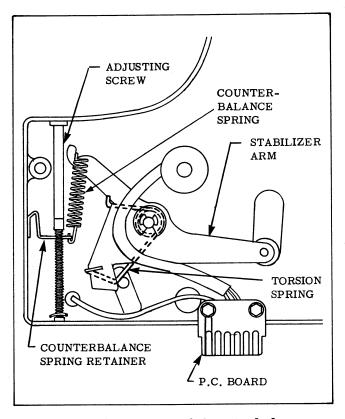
Figure AA. Arms and Counterbalance Spring Installed (Rear View)
